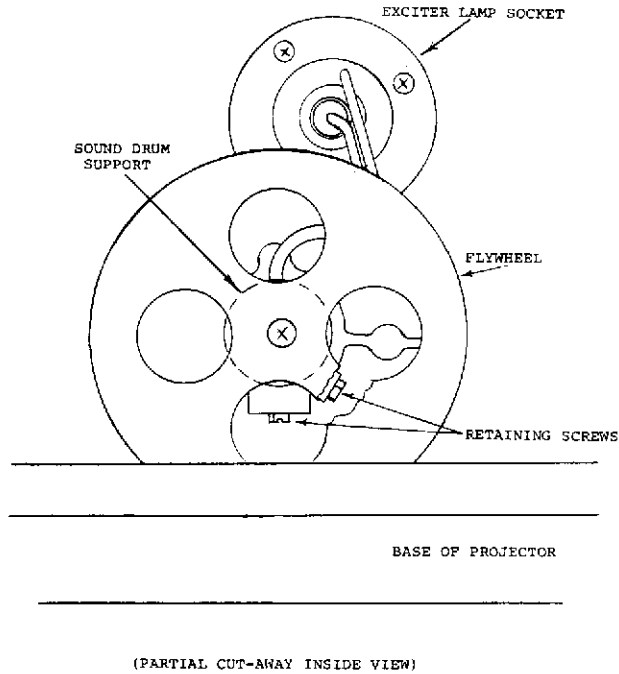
SOUND DRUM SUPPORT RETAINING SCREWS.
